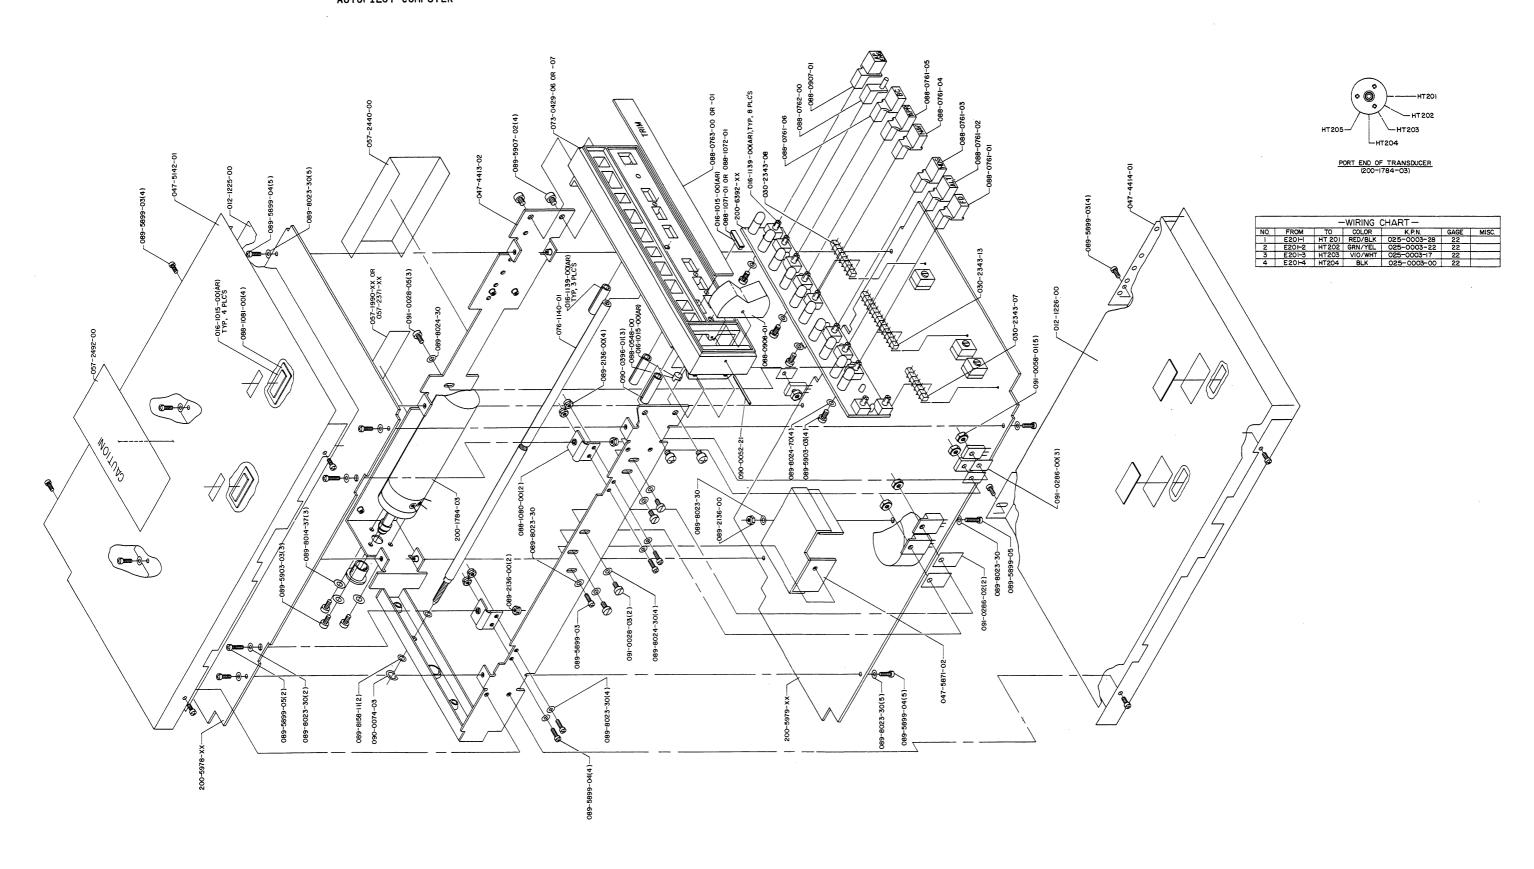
FLIGHT COMPUTER ASSEMBLY (Dwg. No. 300-2817-00, R-3)
